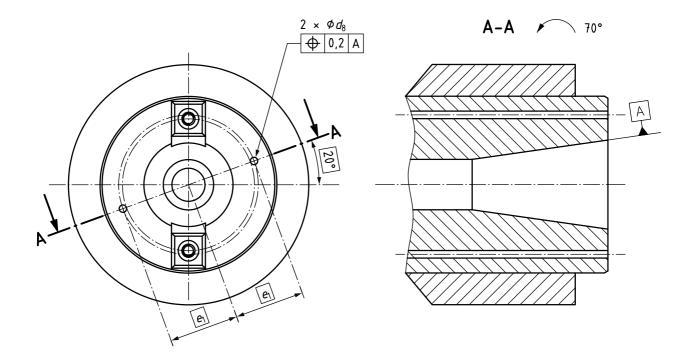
7/24 taper spindle noses of form JF for tool shank of form JF
